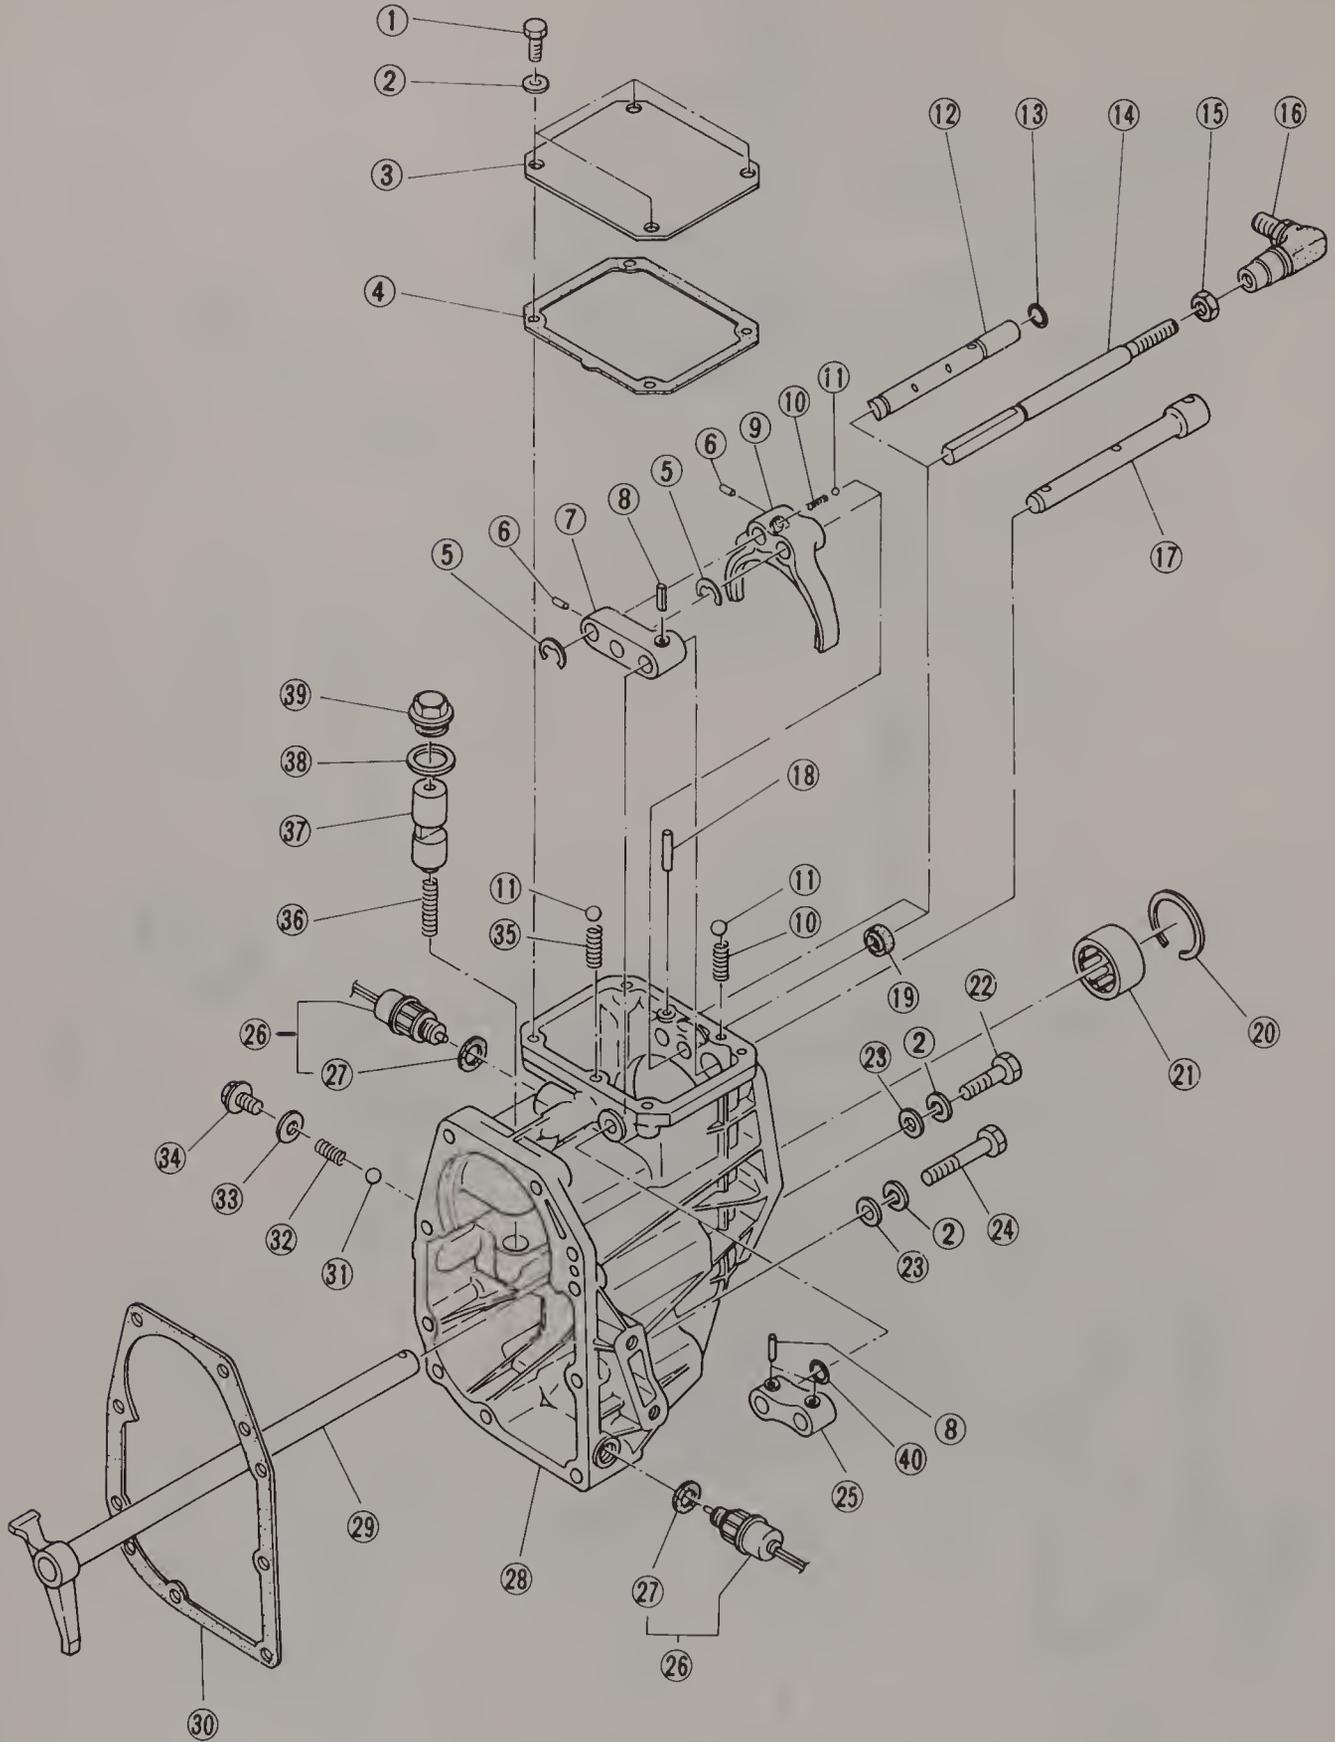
Transfer case components (4WD dual-range) – exploded view
